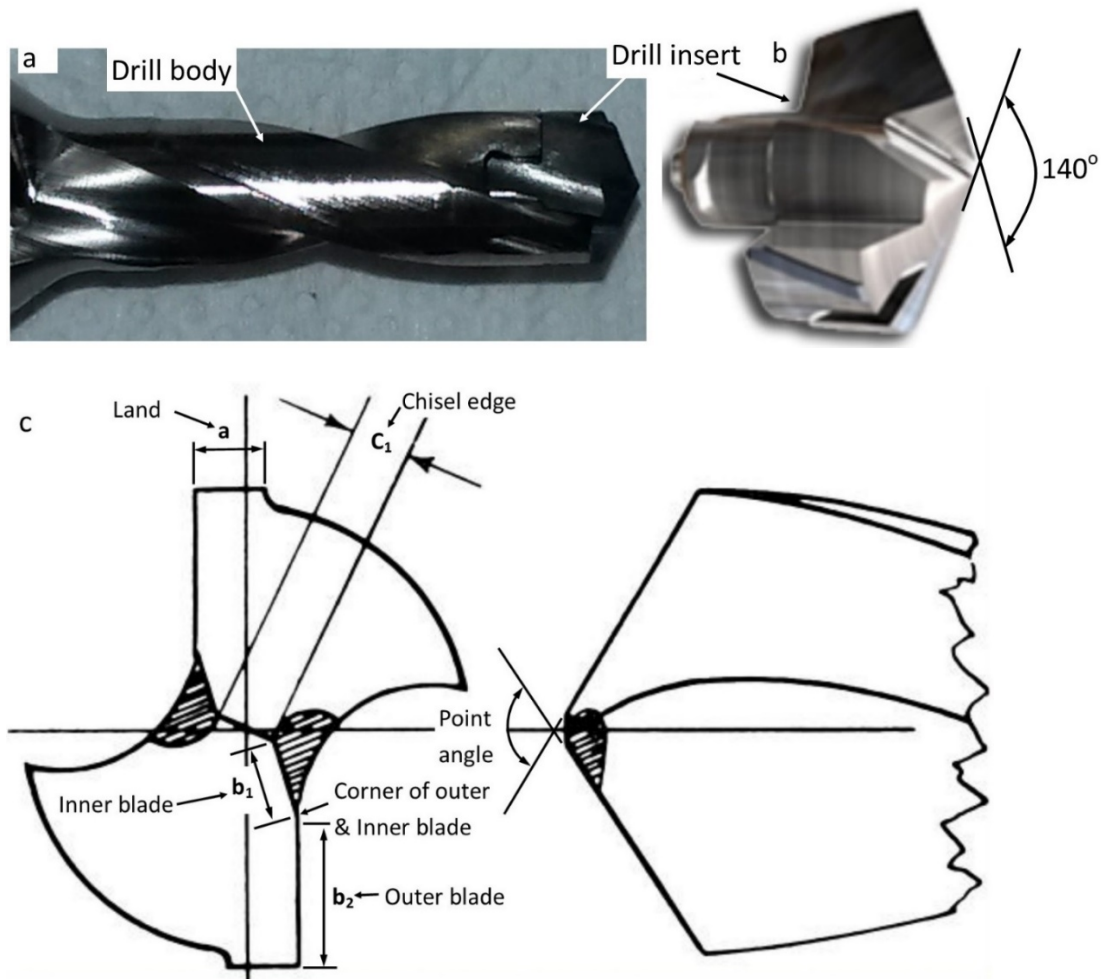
Tool picture and its configuration; (a) insert mounted on the drill body, (b) drill insert, and (c) simplified tool nomenclature.
